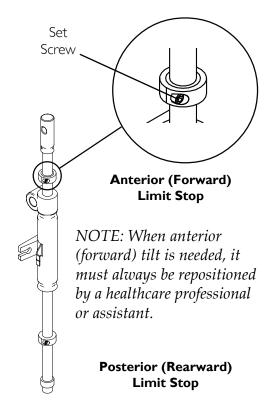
Adjusting Limit Stops of the Tilt Mechanism - Adjusting Posterior (Rearward) Limit Stops
